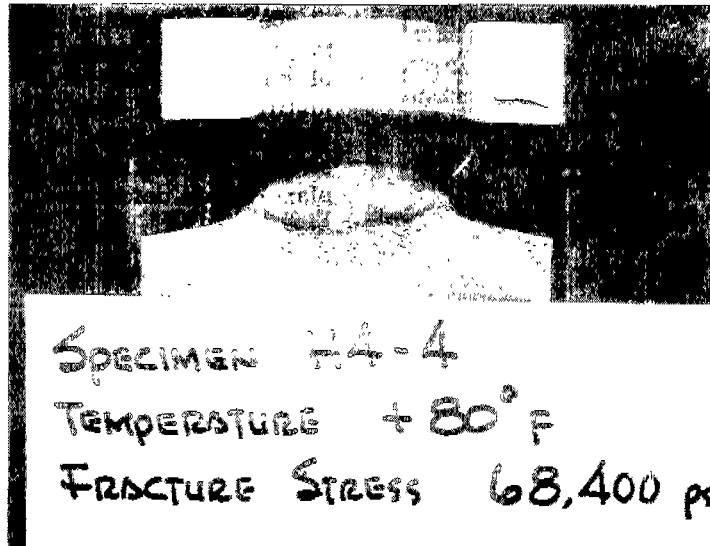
FRACTURE SURFACES OF 1/2-in. THICK SPECIMENS TESTED AT +78 F.
